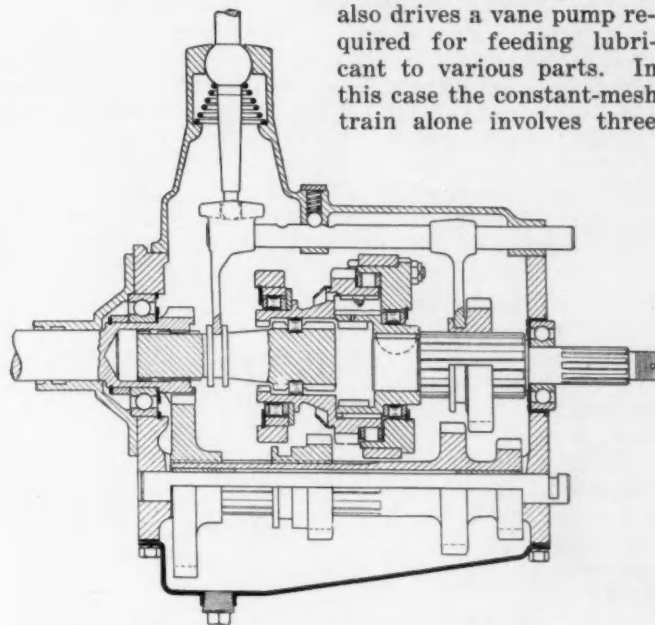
JOHNSON FOUR-SPEED GEARSET
